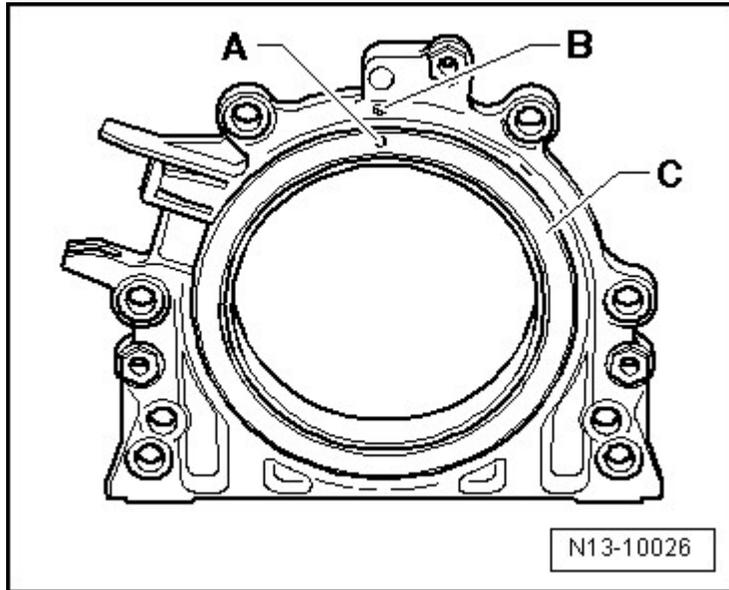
Identifying Locating Pin On Sensor Wheel Aligns With Marking On Sealing Flange
